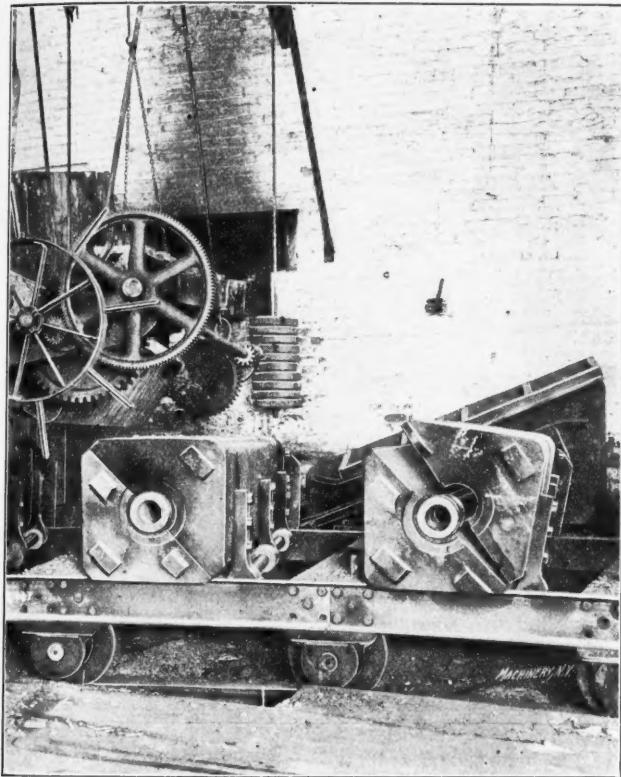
Immediately after Pouring. Mold, entering Opening Device, partially opened.
